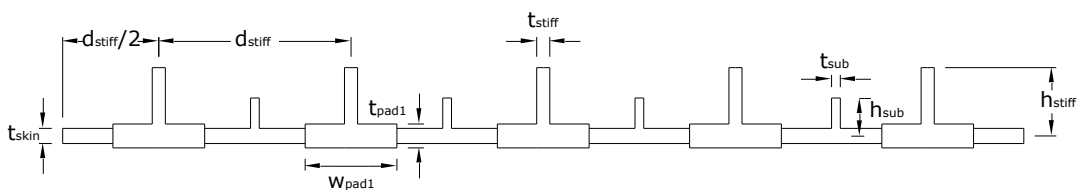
Straight stiffened plate with substiffeners and pads under stiffeners
